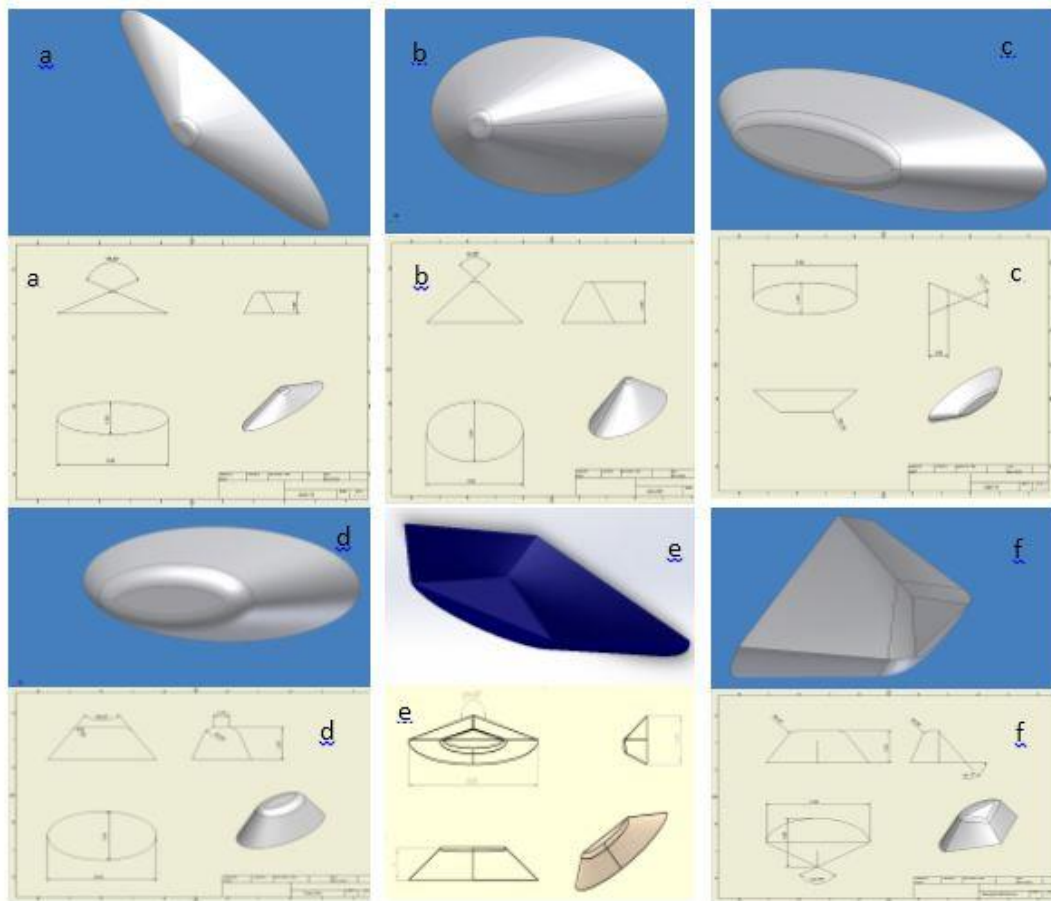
Dimensions and geometry of the cutting volume to form the tooth palatal side; (a) cone 15, (b) cone 30, (c) tube 15, (d) tube 30, (e) mixed cavity 15, and (f) mixed cavity 30.
